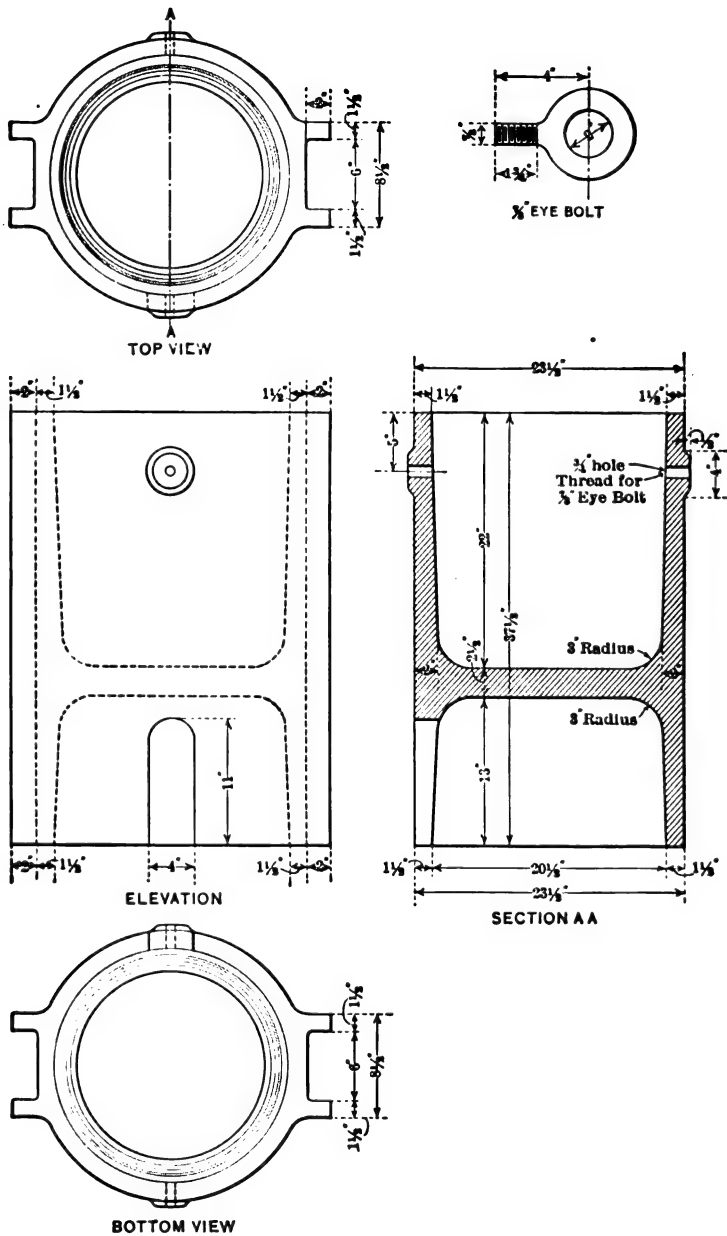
CASTING FOR CONCRETE PILE CAP.
